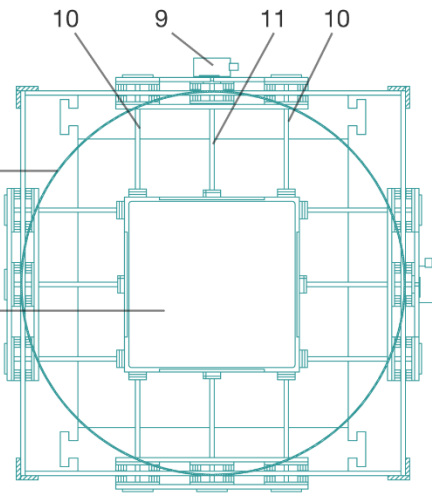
Improved Fibre Printer General Arrangement Drawing
